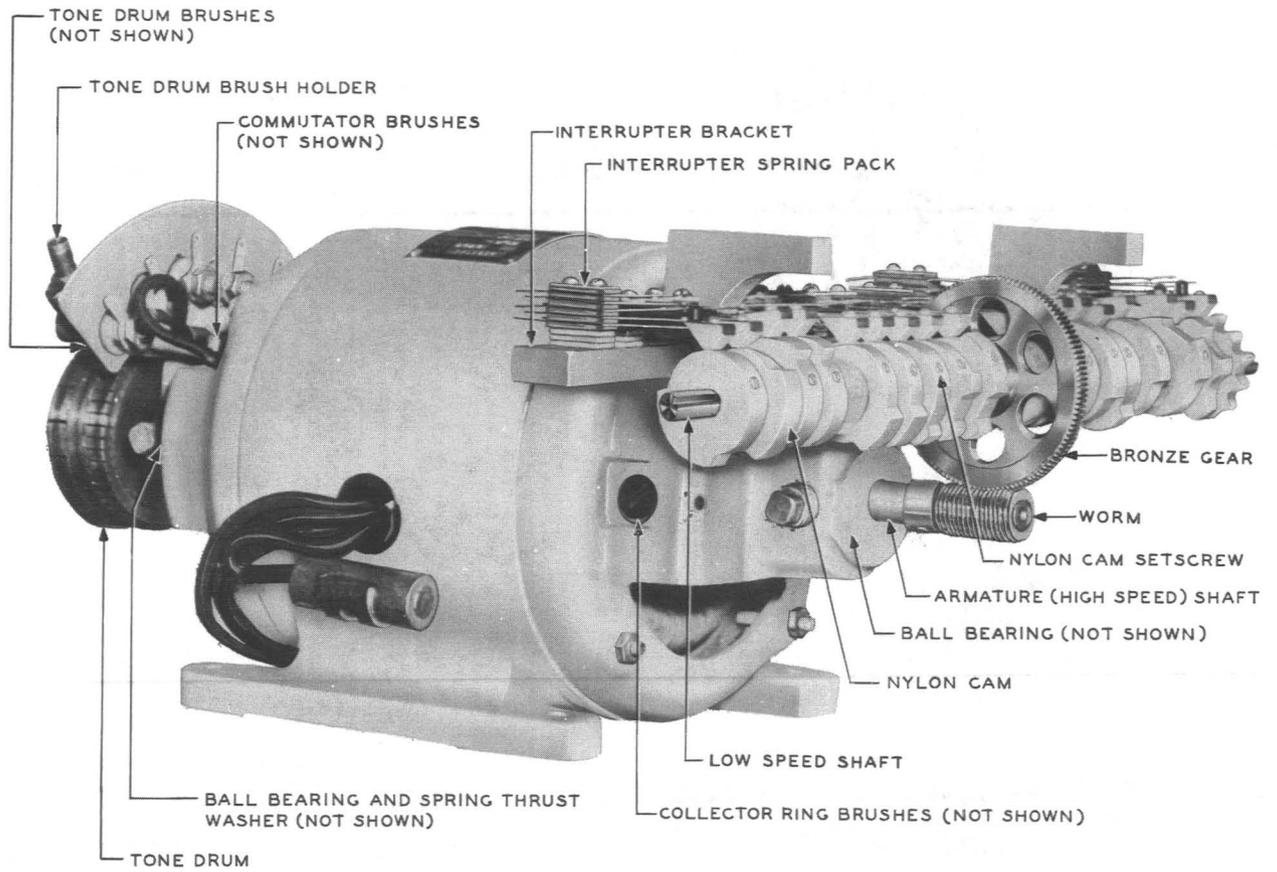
KS-5659 L1 Ringing Machine Illustrating Nylon Cams
